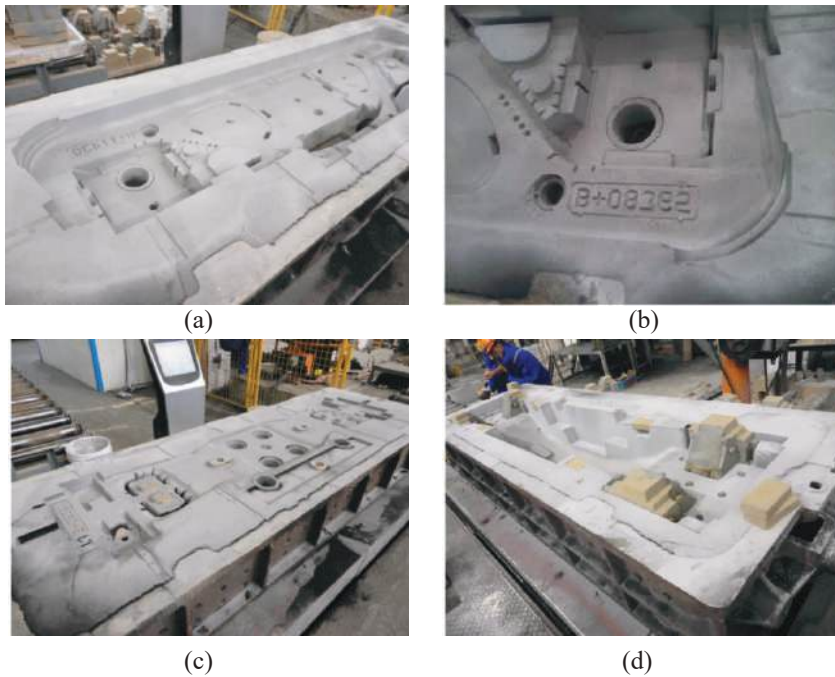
Spraying coating on (a) half mould of a side frame (b) an end of mould of side frame (c) upper mould of a swing bolster and (d) lower mould of a swing bolster in production.
